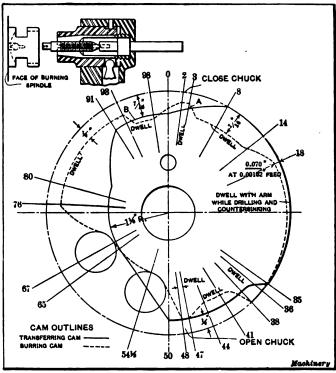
Transferring and Burring Cams for the Piece shown at A in Fig. 28
